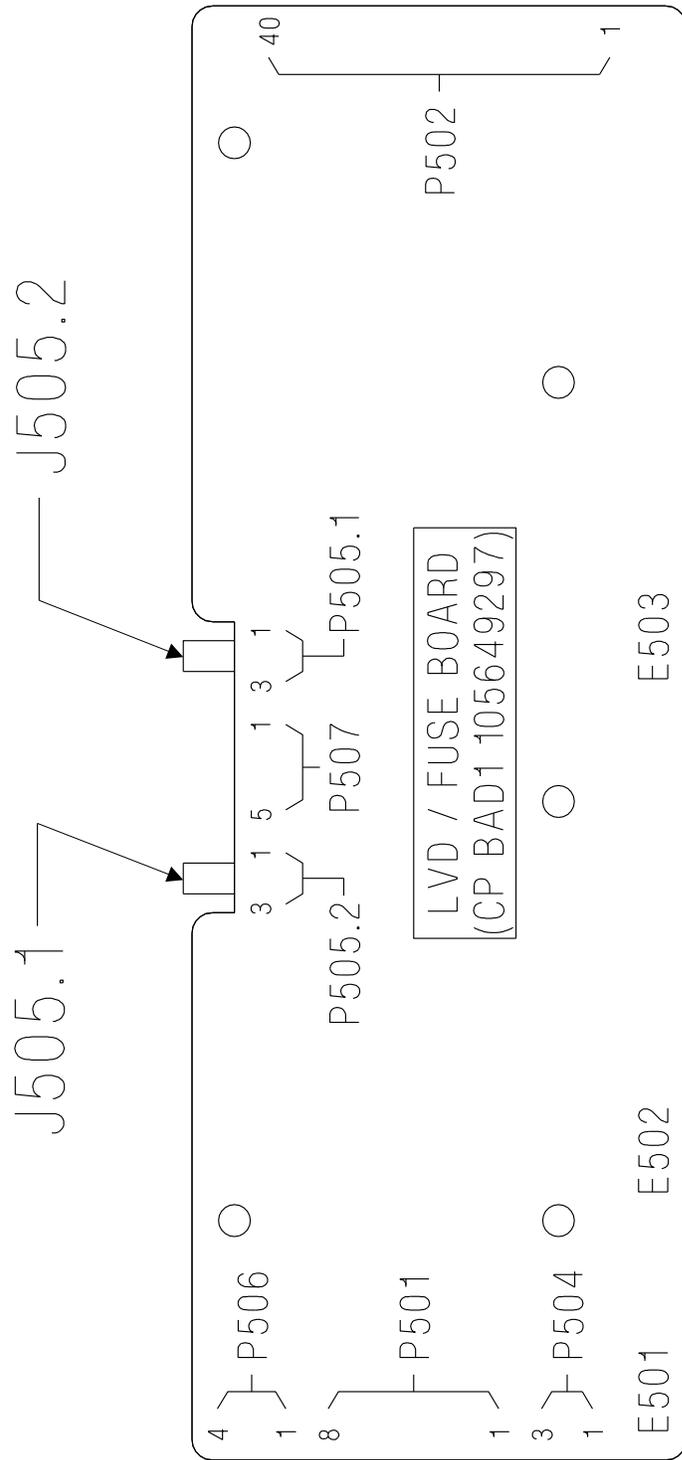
LVD/Fuse Board (CP5) Jumper Locations
